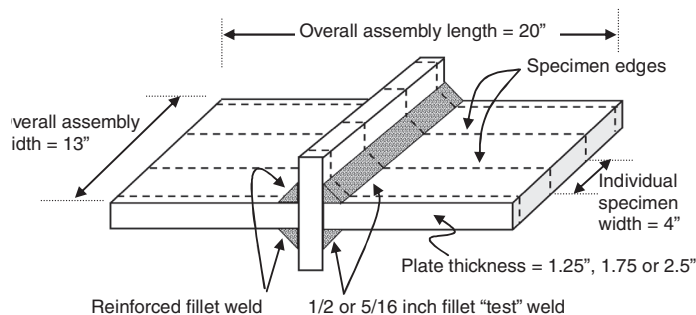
Cruciform specimen assembly showing key dimensions and fabrication details.
